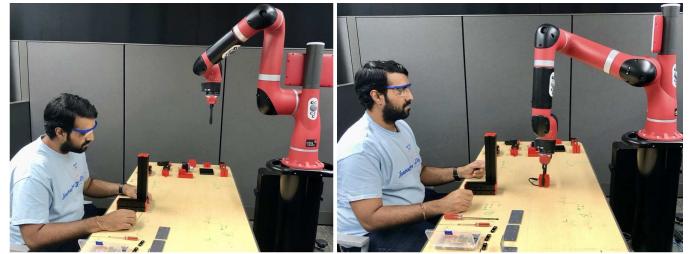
HRI Setup with Baxter Robot: [left] User performs an assembly task. [Right] Robot provides parts for assembly.
